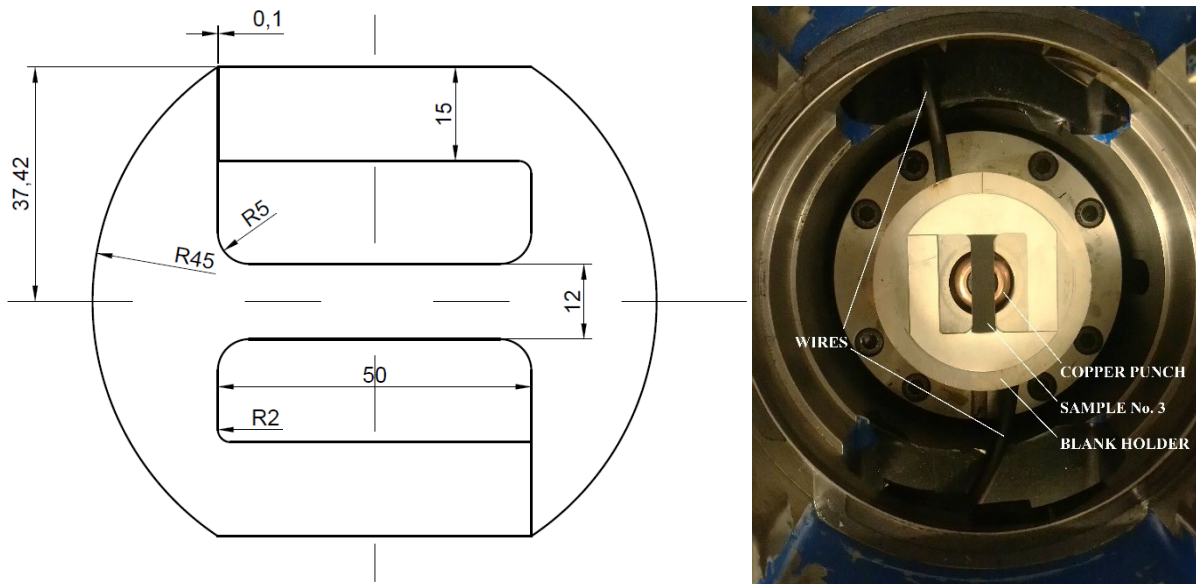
a) The shape and dimensions (in mm) of sample No. 3; b) Part of the experimental setup with sample No. 3.
